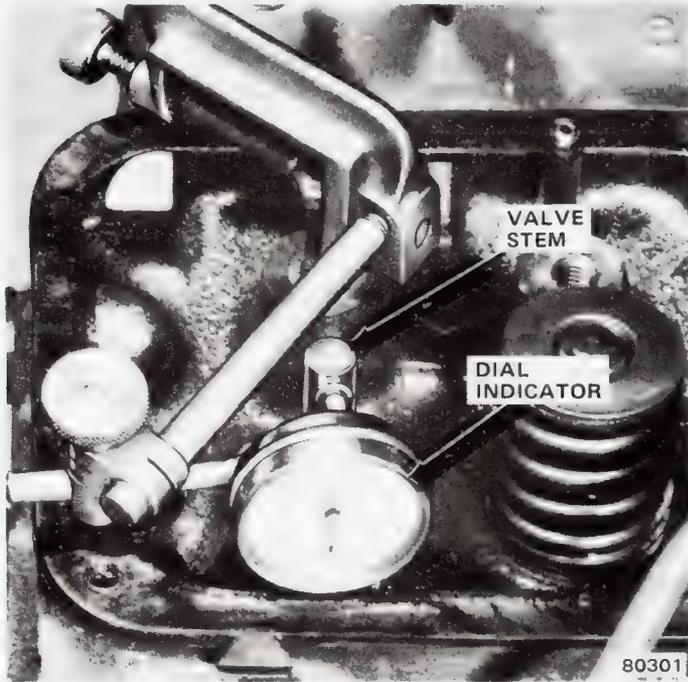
B-132 Valve Stem-to-Guide Clearance Measurement
